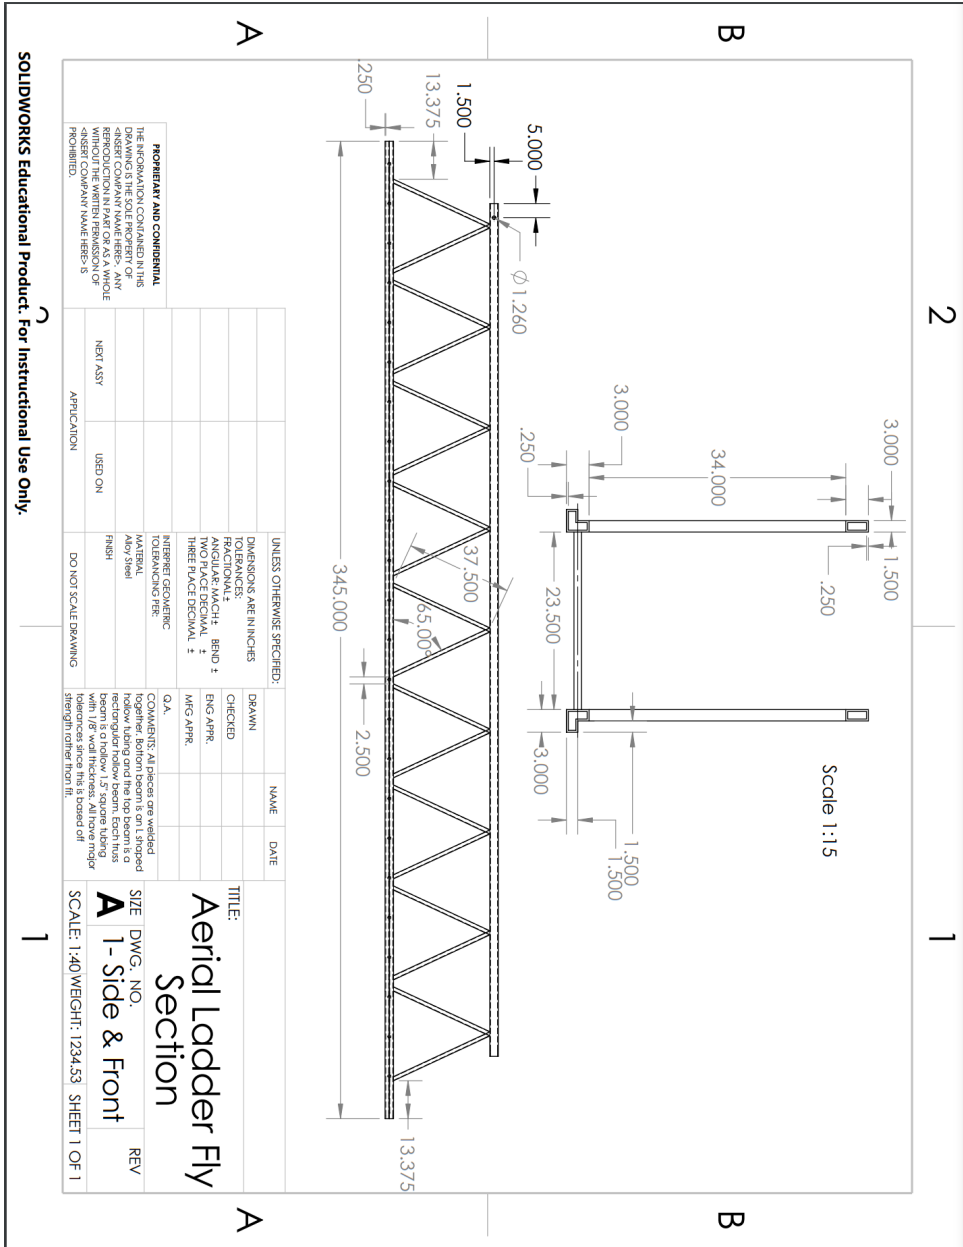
Side and Front Views of the Dimensioned Drawing of the Fly Section of the Aerial Ladder
